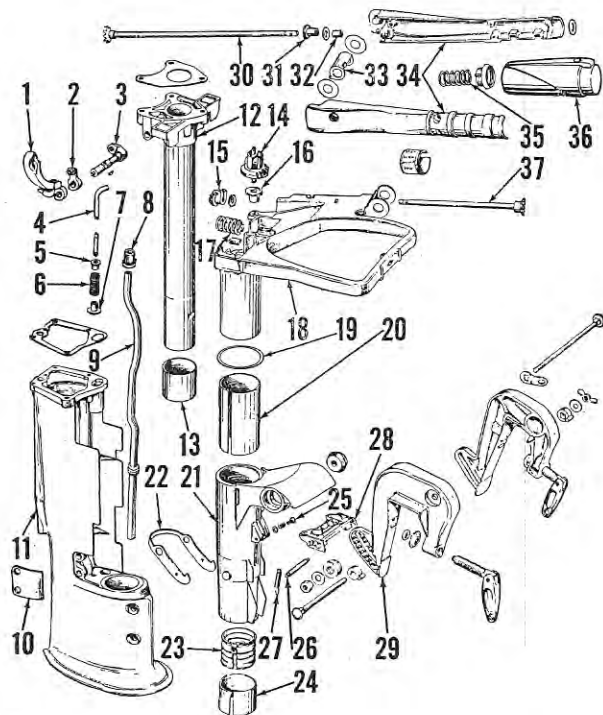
Exploded view of drive shaft housing, exhaust housing and stern bracket used on models 12D11, 12S12, 12S13, 12-S14 and 12S15.
